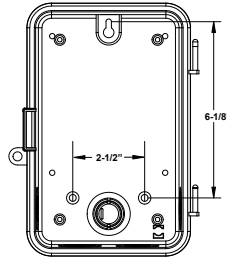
Rear View of Enclosure with mounting hole dimensions
